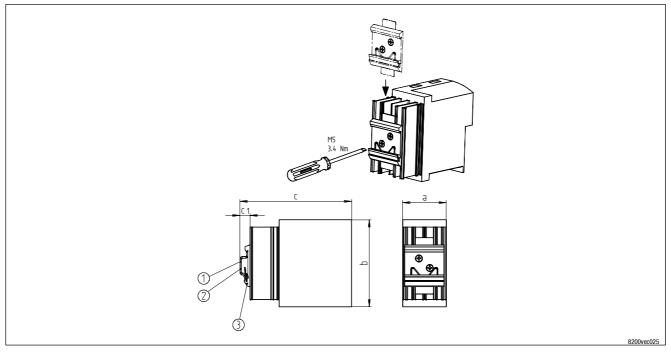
DIN rail mounting 0.25 ... 2.2 kW
